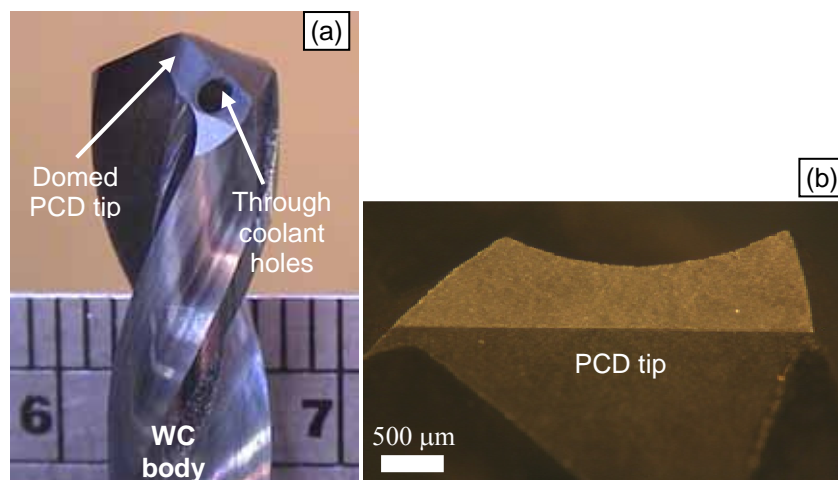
Helical fluted domed PCD drill used in Phase 3B: (a) side view and (b) end view
